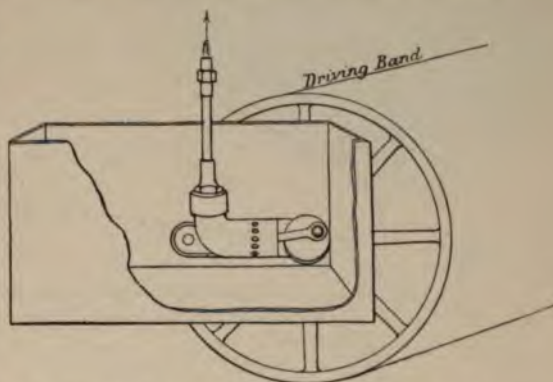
Bates' Engine: Lubrication Oil Tank for Main Bearings.
